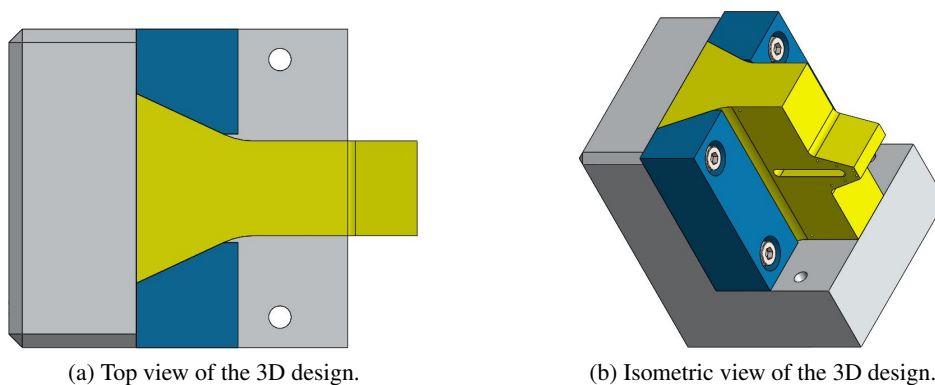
Final 3D design of the hybrid polymer gear tooth base and support.
